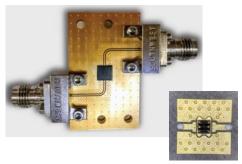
IC in organic package on evaluation board. (a) Package with lid on evaluation board. (b) Close-up of package without lid, showing flip chip die atop package substrate.
